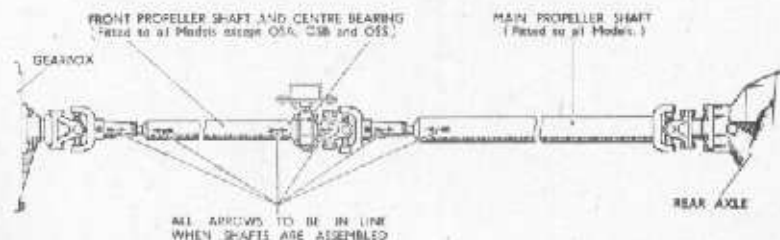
Alignment of propeller shafts and universal joints. The arrows stamped on the shafts and joints must be lined up—as shown above—to bring the universal joint yokes in correct alignment and so ensure running balance. The front shaft and centre bearing is fitted to Model OL and Bus models only.
